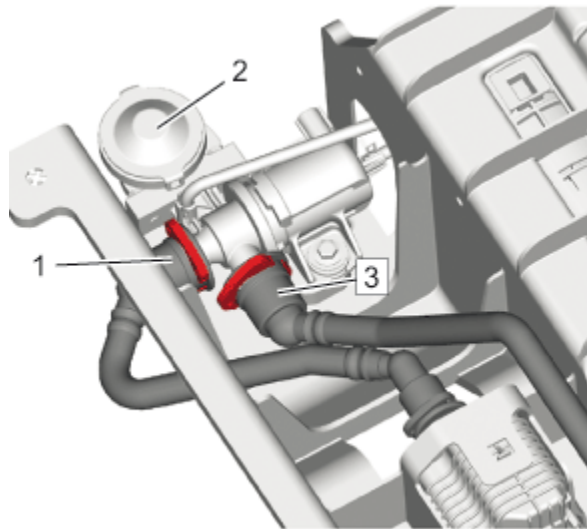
Evaporative Emission Canister Control Valve Vacuum Hose And Evaporative Emission Canister Vent Solenoid Valve
